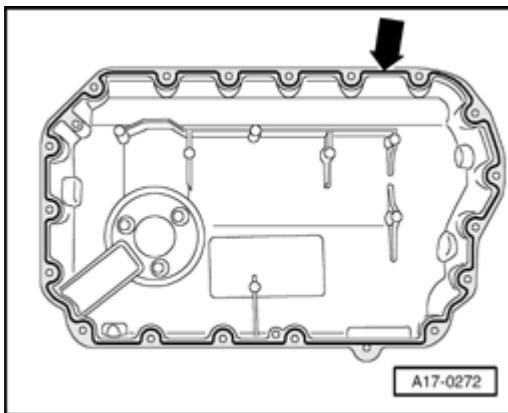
Applying Sealant Bead To Clean Sealing Surfaces Of Oil Pan (Lower Part)
